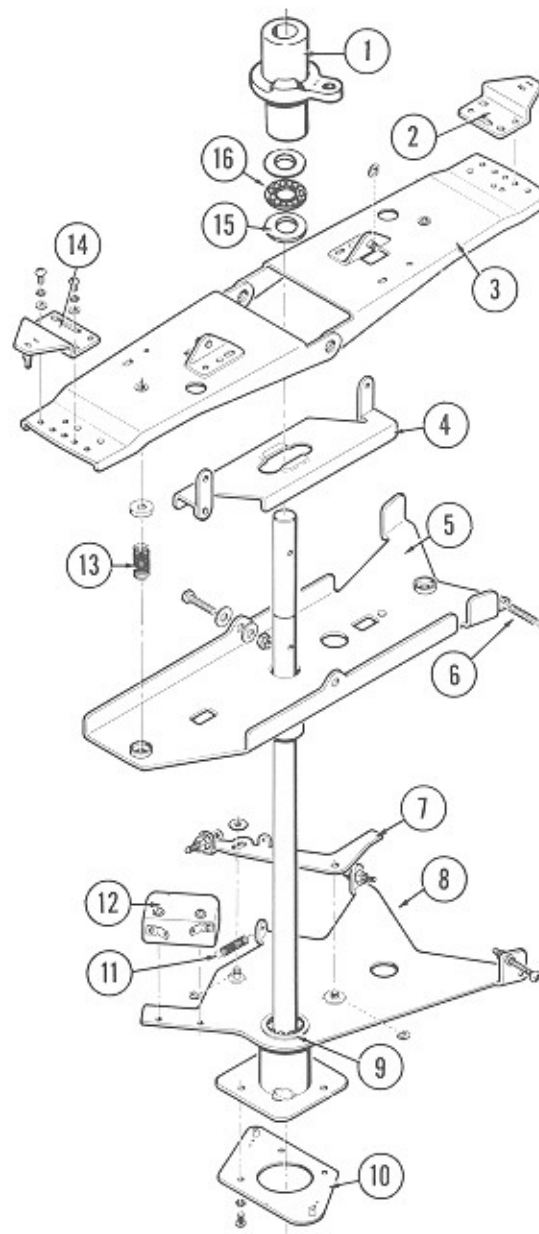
SELECTOR CRANK AND SHAFT ASSEMBLY
